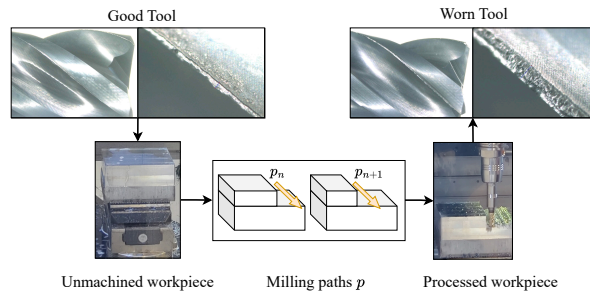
Procedure for one tool life cycle, involving machining N milling paths until the tool becomes excessively worn.
